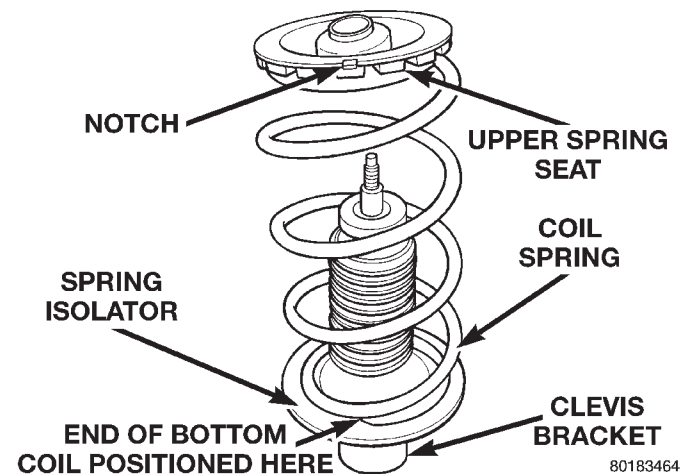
Coil Spring And Spring Seat Correctly Installed
